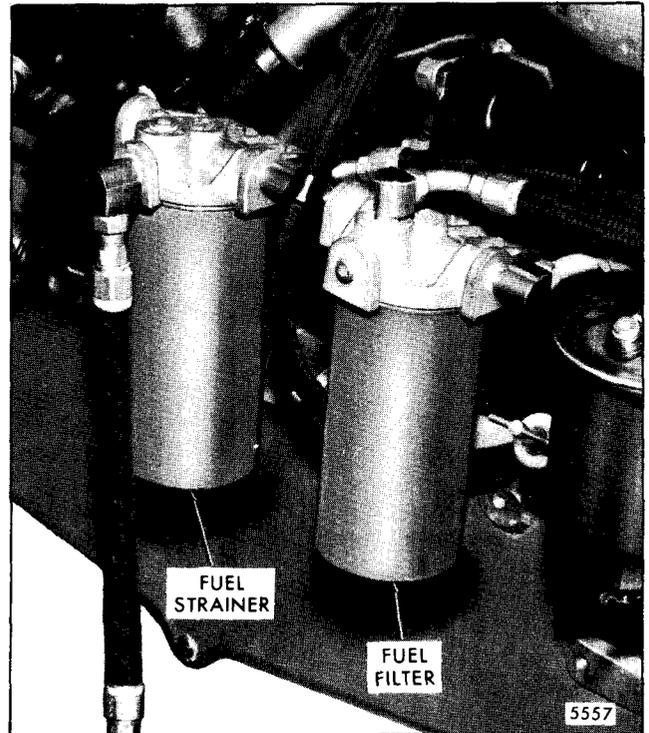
Typical Spin-On Fuel Filter and Strainer Mounting
